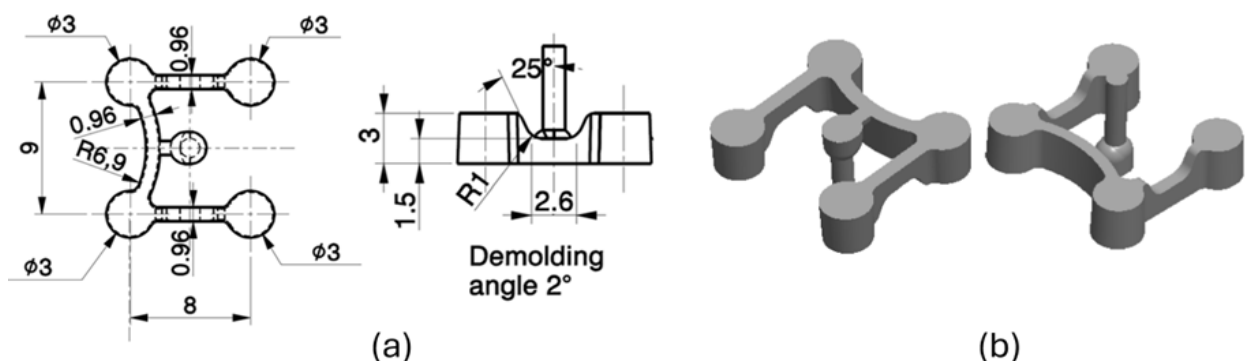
Drawing (a) and 3D views (b) of the moulding part.
